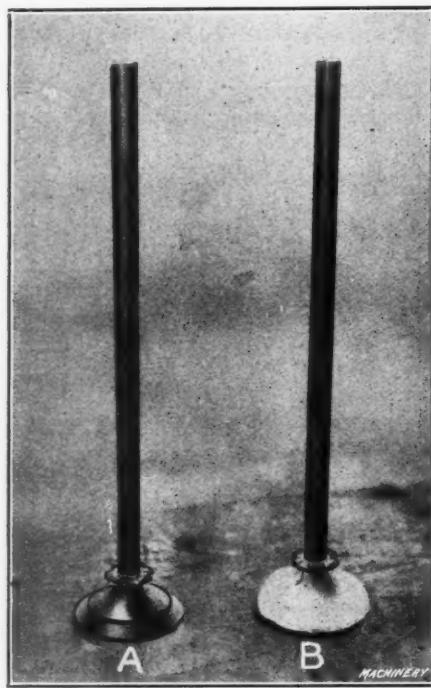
Poppet Valve before and after applying the Cast Iron by Autogenous Welding
